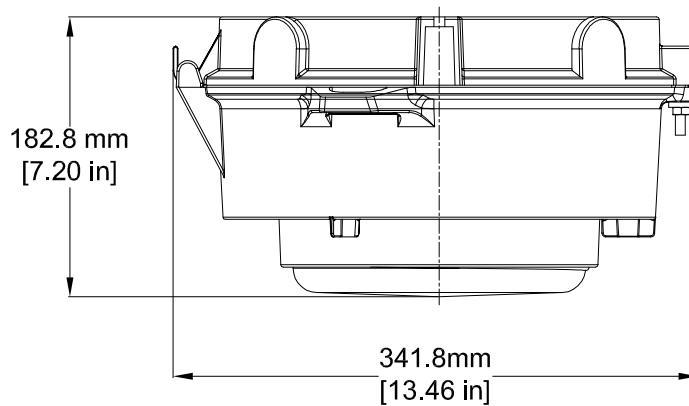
LUMINAIRE WITH CEILING HOOD
